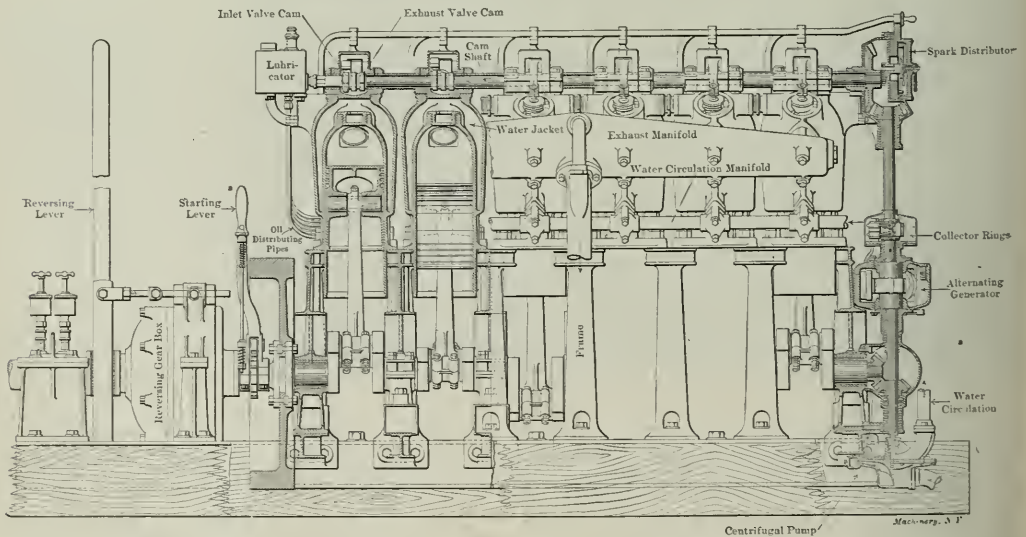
Side Elevation of Hurd & Haggin Six-cylinder Engine, showing the Exhaust Manifold and Section of Cylinders.
